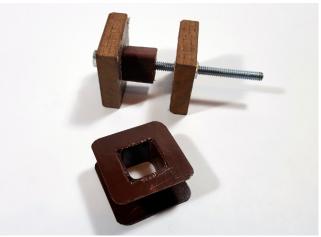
Fabricated from three pieces of wood and a long steel bolt, this combination mandrel/assembly aid assists both in the production of the empty bobbins, and in the coil winding process, later.
